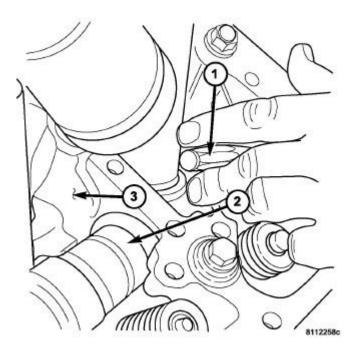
Left Cam Gear Timing Mark & Retaining Bolt Courtesy of CHRYSLER LLC
